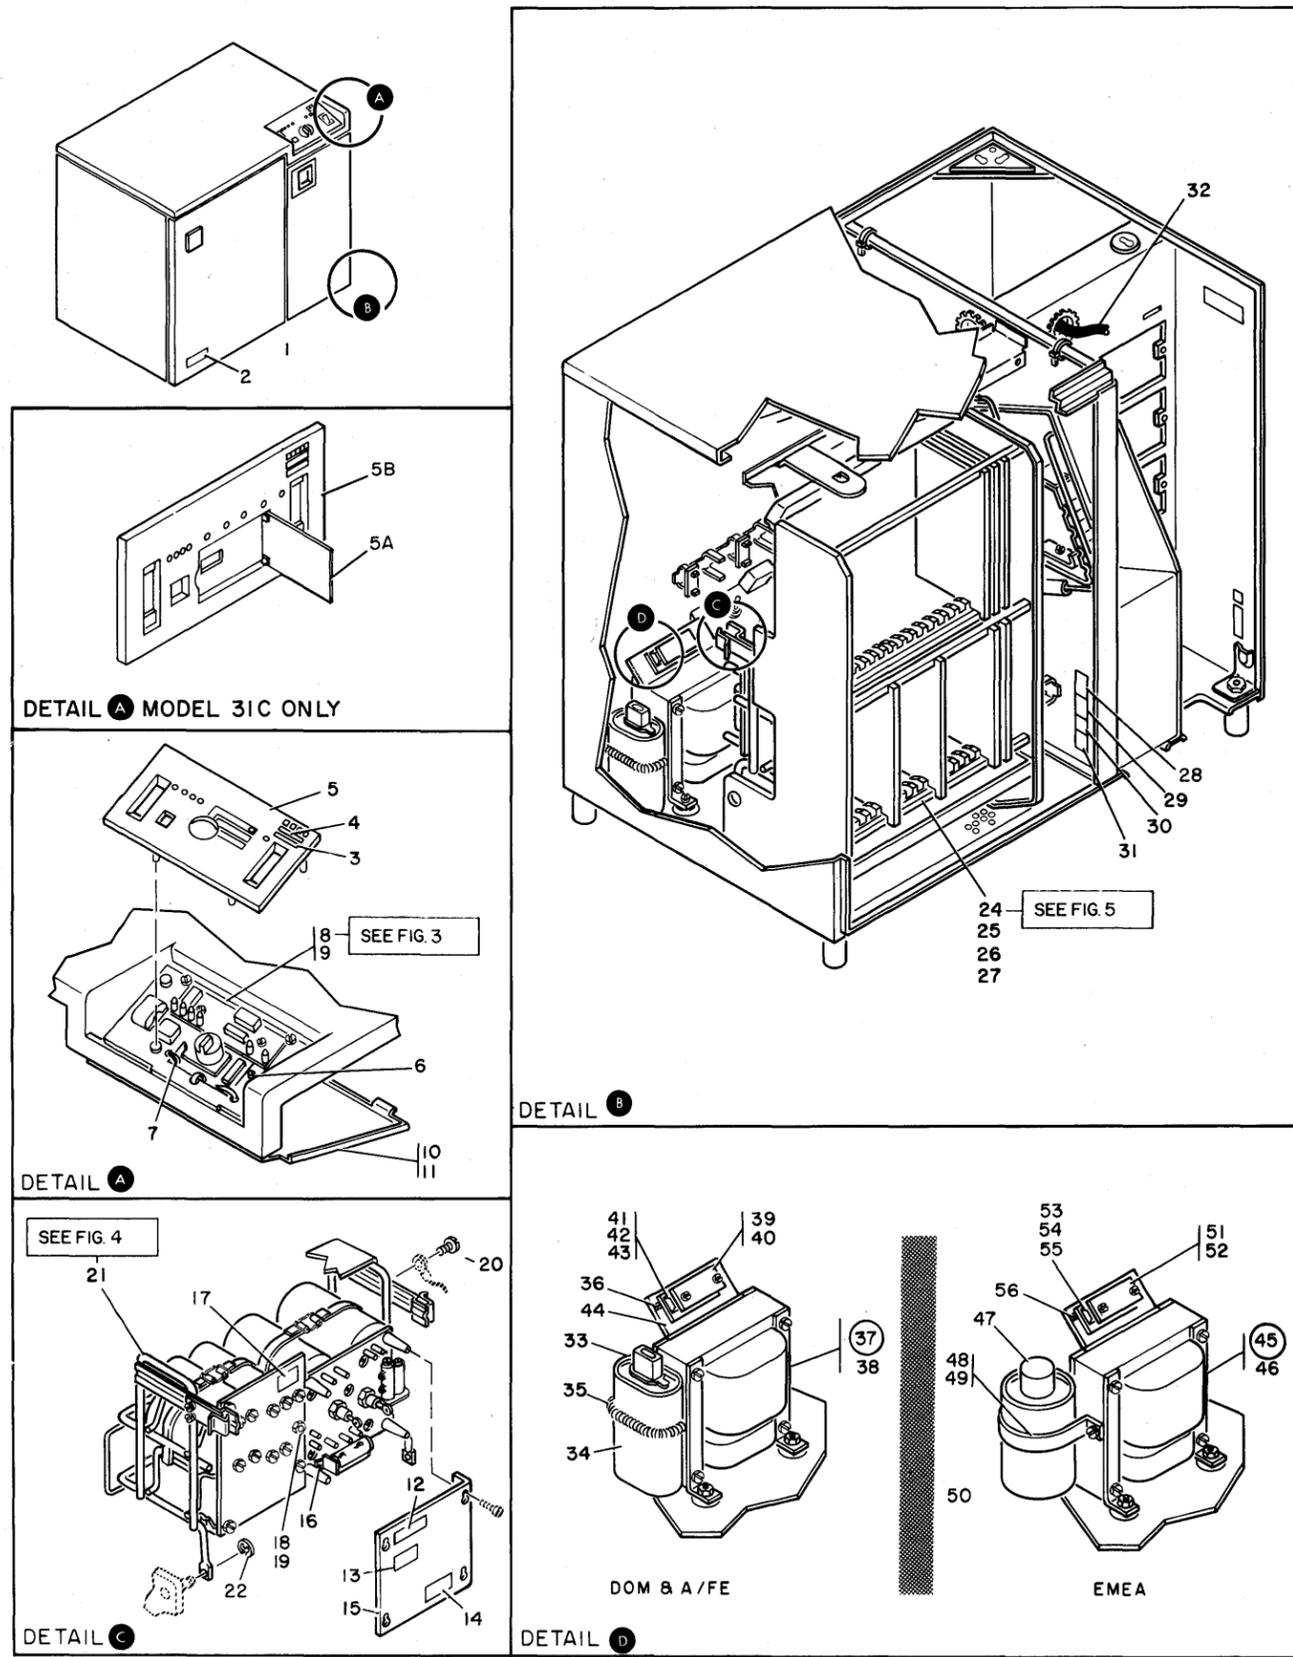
FINAL ASSEMBLY. SHEET 1 OF 2. INDEX NOS. 1-56. SEE LIST 2.
